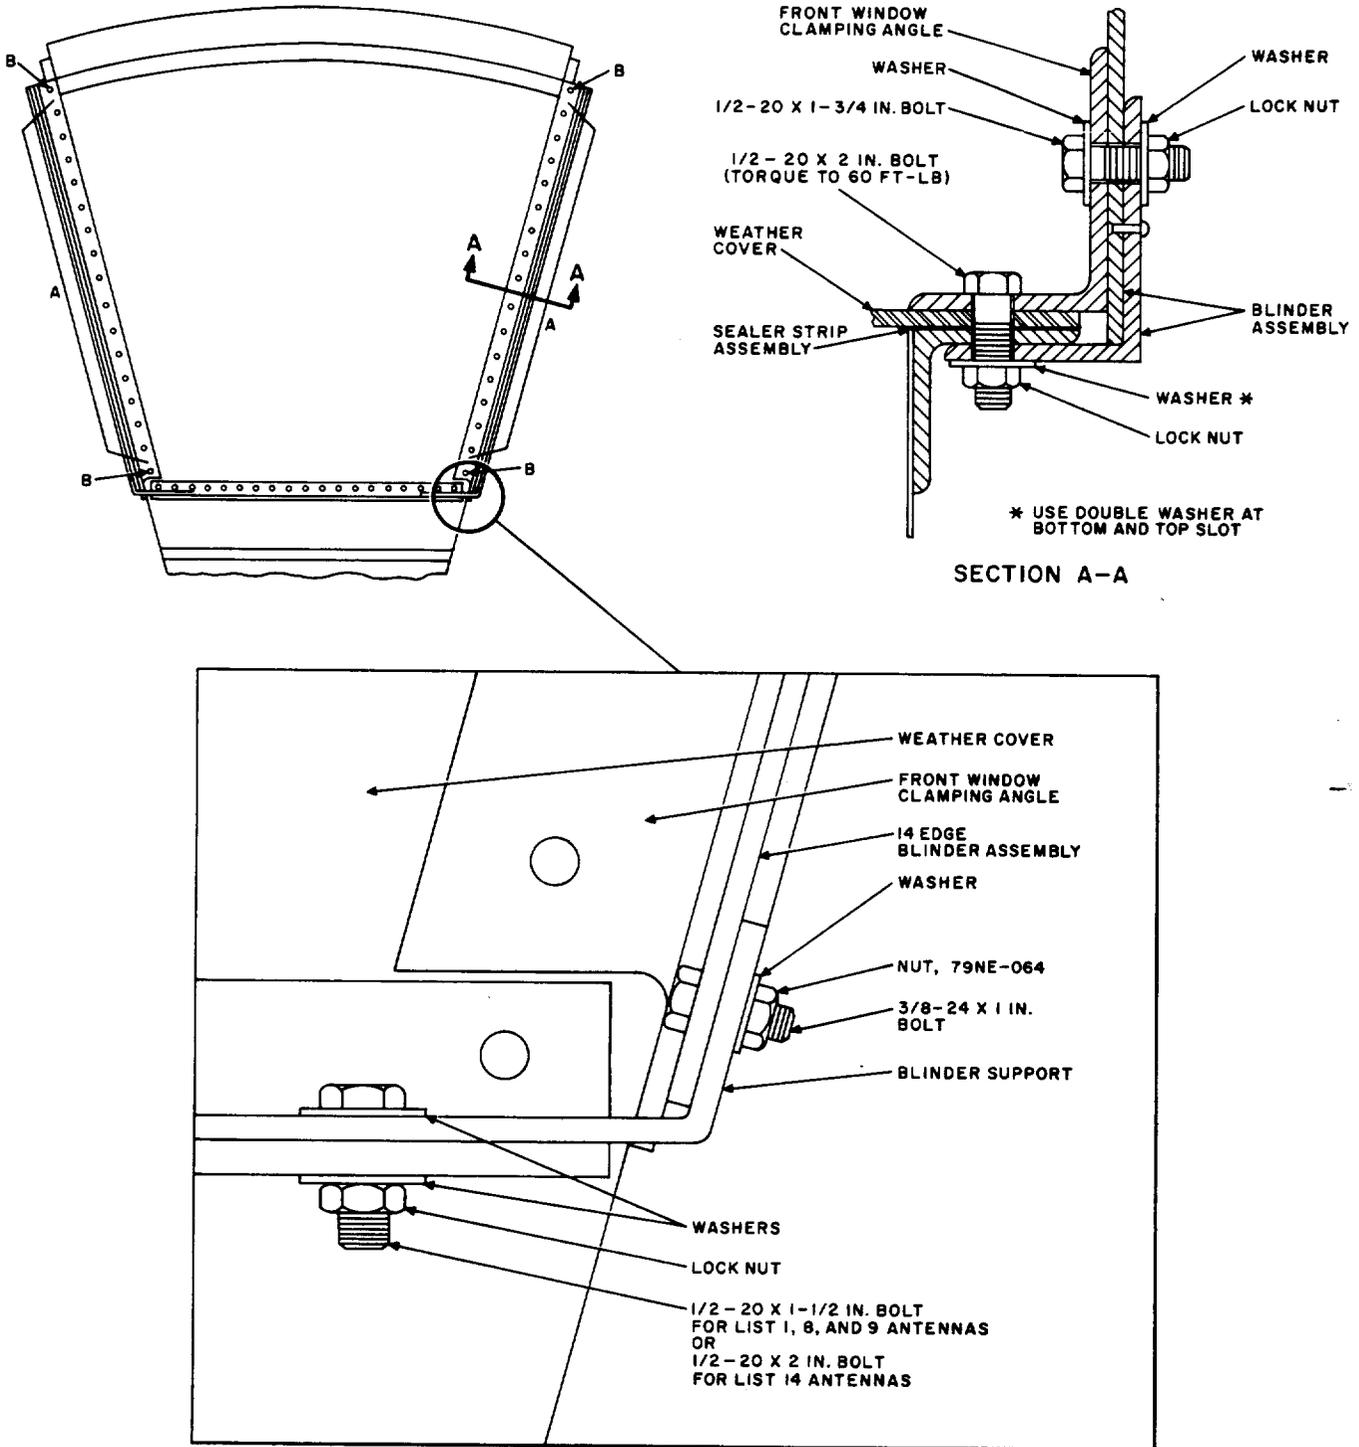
KS-15676 Antenna Face and Blinder Assembly
